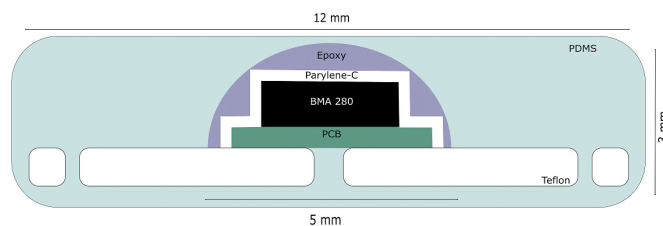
Transversal section of the sensor, illustrating the different packaging layers.
